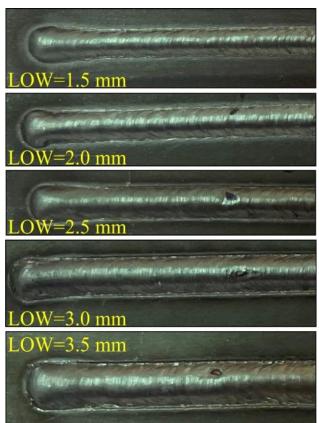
Samples obtained by handheld laser welding with changes in LOW.
